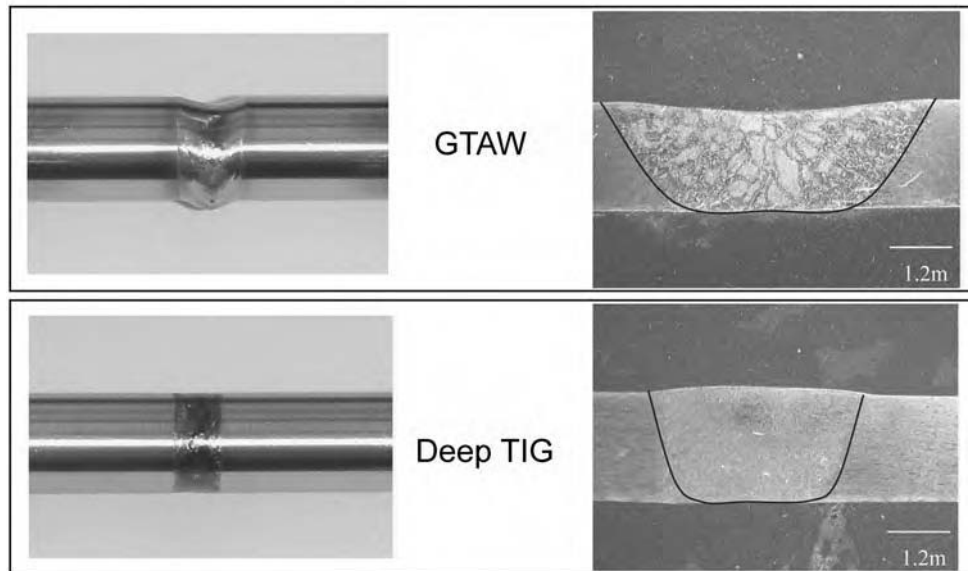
Use of DeepTIG on thin-walled 2205 duplex tubing to reduce sagging from low depth-to-width ratio. GTAW, gas tungsten arc welding. Courtesy of the Edison Welding Institute and Sandvik
